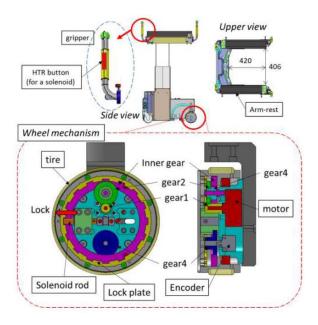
Wheel locked/unlocked operated by Hold-to-run (HTR) button on the gripper [4]
